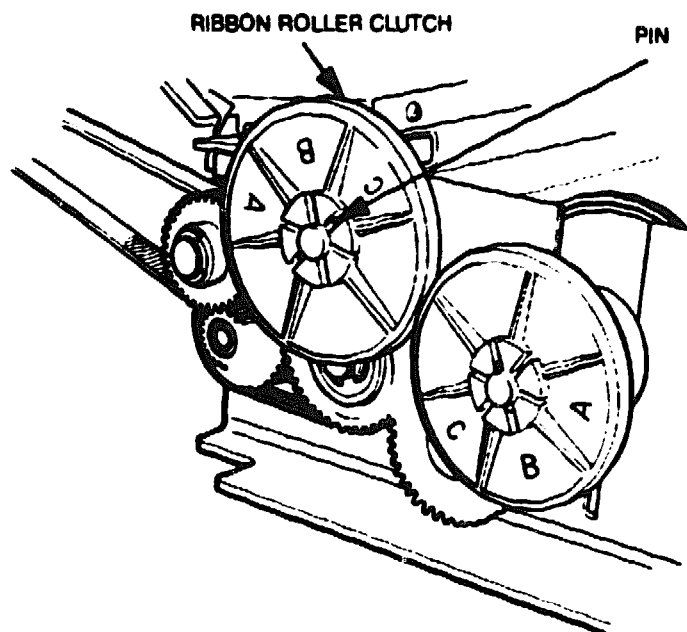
Ribbon Feed Roller Clutch Adjustment
